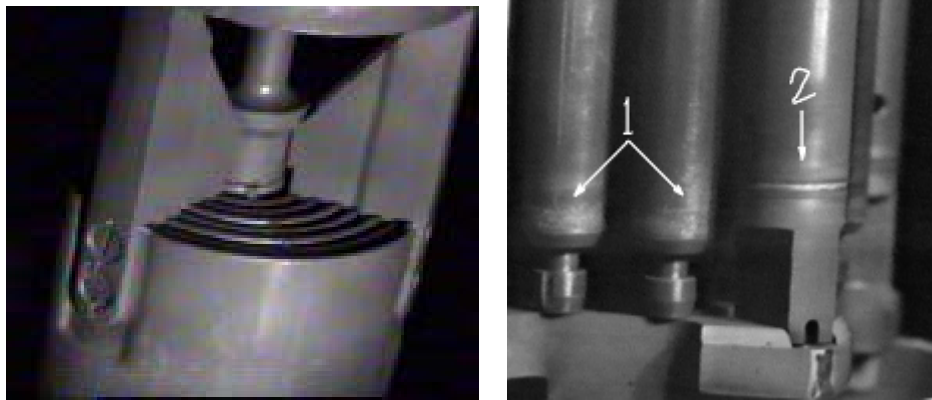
Underwater visual inspection of fuel element (left: top end of HFETR fuel element; right: bottom end of a testing PWR fuel bundle).
